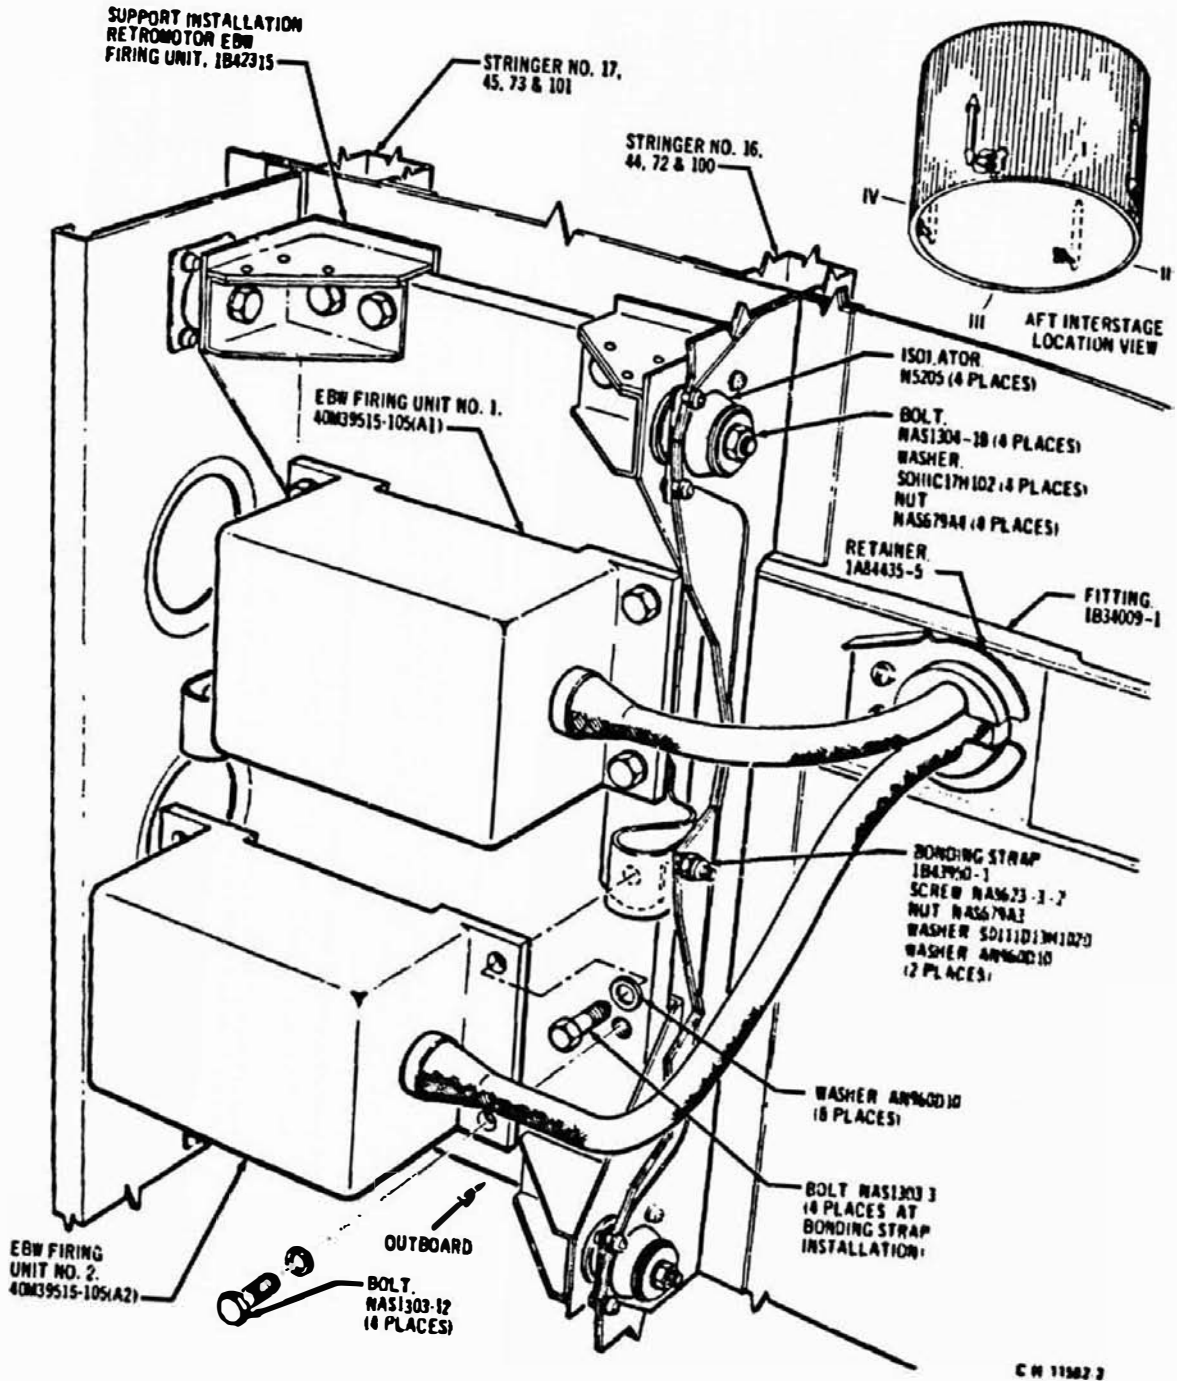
RETROMOTOR EBW FIRING UNITS - INSTALLATION VIEW
